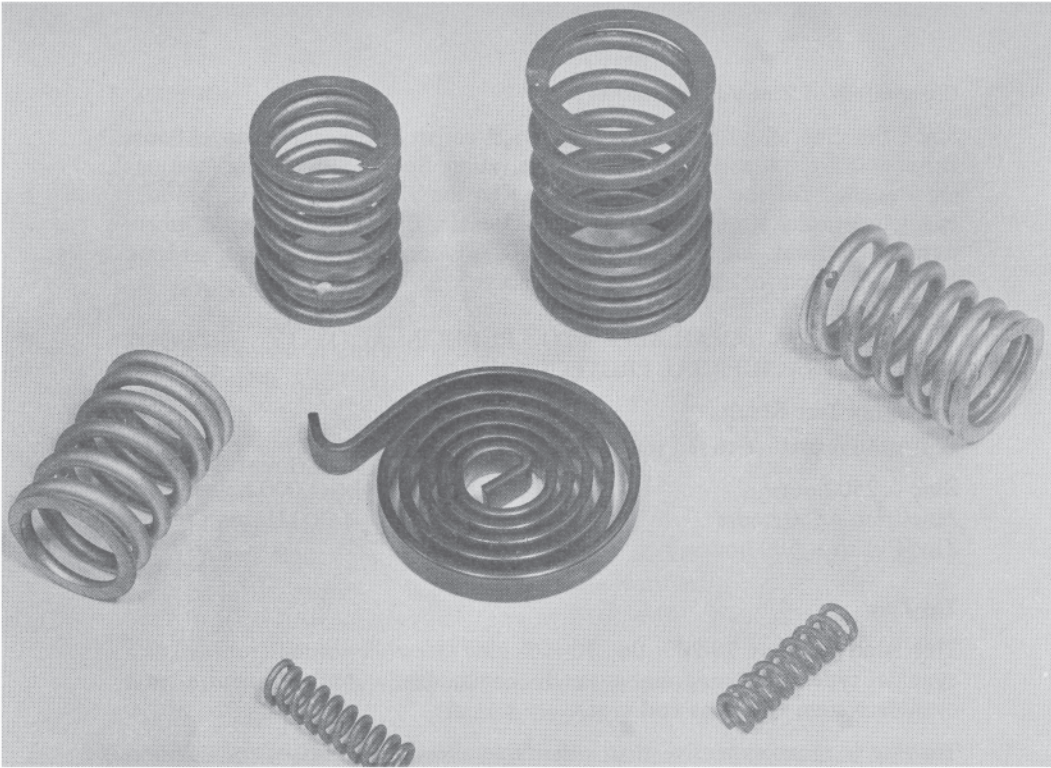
Illustration H — Cadmium plated springs with black and olive chromate coatings.
